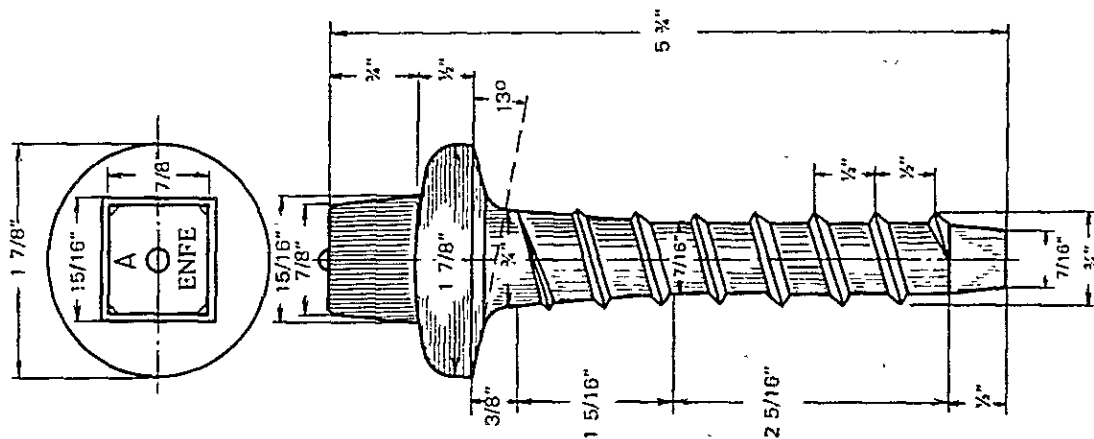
Dimensions of 3M-63-AREA Timber Drive Spike
